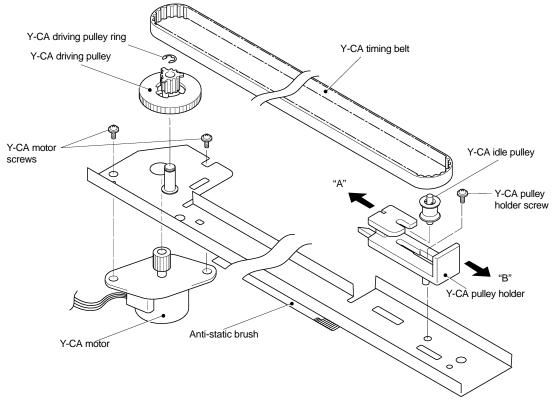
Disassembling the Y-CA Chassis Assy
